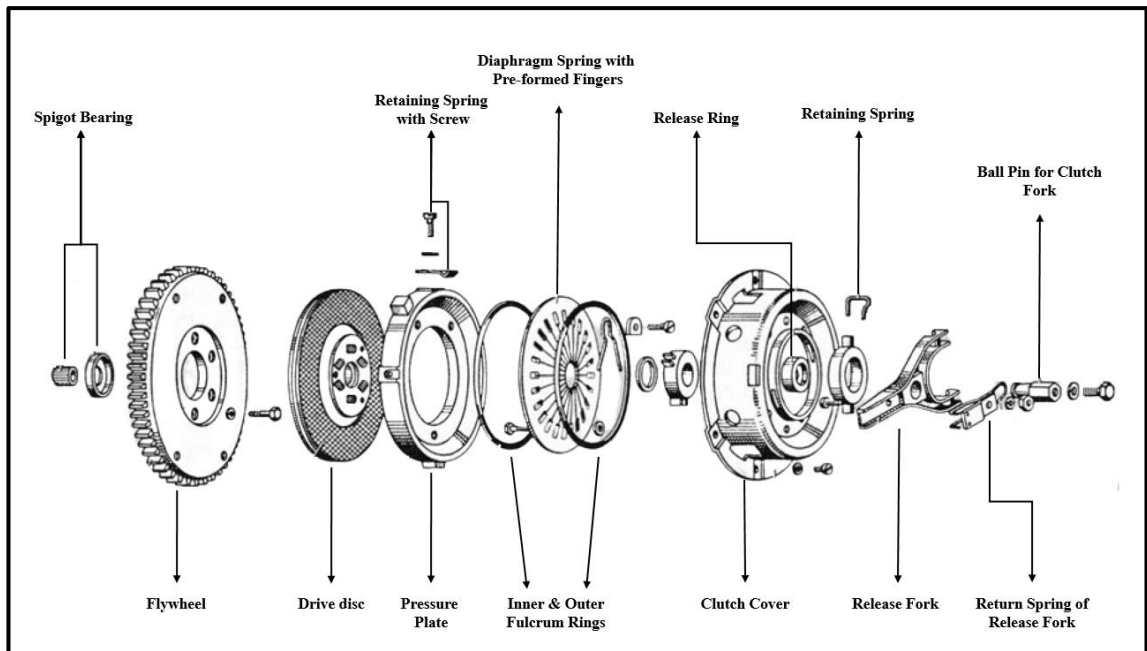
The multi-plate clutch developed by Chevrolet, the coil springs were replaced by a diaphragm spring [24].
